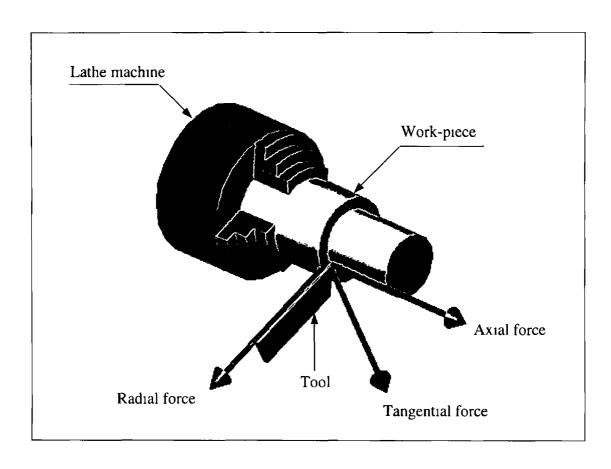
1 Three components of measurable cutting forces acting on single-point turning tool
